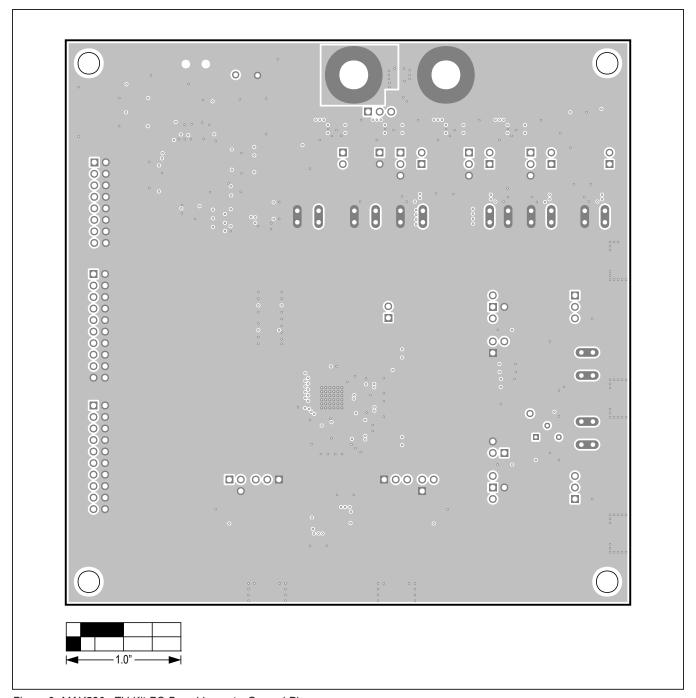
MAX586x EV Kit PC Board Layout—Ground Planes
